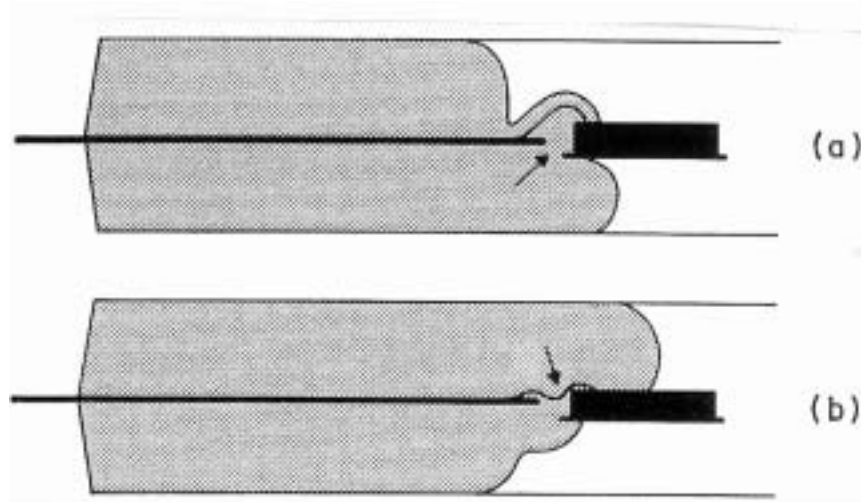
Cross section view of flow of the moulding compound in the cavity of the packaging mold showing the advancing flow front split into two separate fronts as it divides around the leadframe: (a) the preferred configuration for moulding wire bonded devices is for the flow in the lower cavity, the one without the wire bonds, to lead the flow in the upper cavity, (b) the less desirable configuration of the leading flow in the cavity half that contain the wire bonds.
